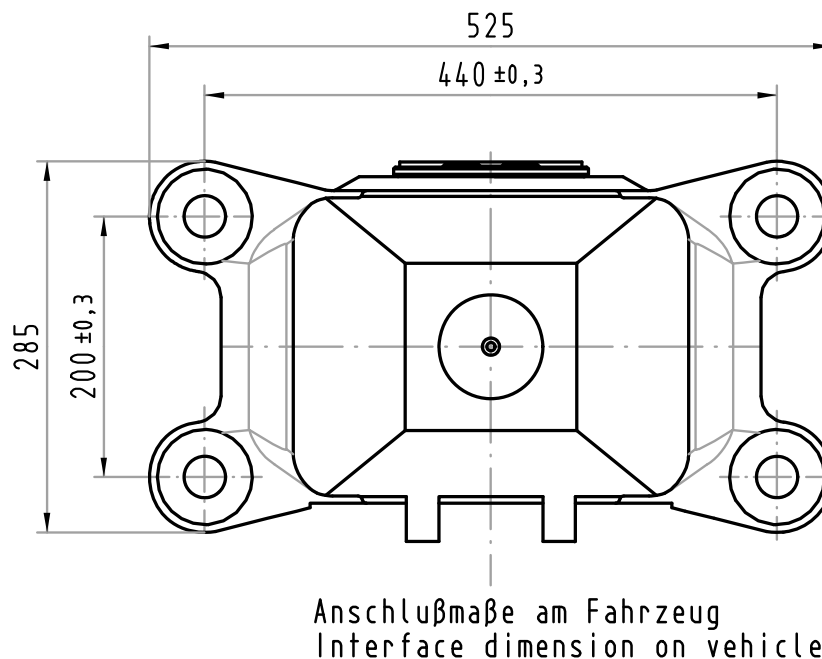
Fitting dimensions for the coupler half in mm
